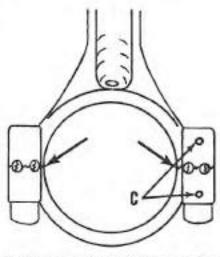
Uneven fractured parting line of rod and cap (shown by arrows) assures positive fit after assembly. Be sure correlation marks (C) are aligned.
